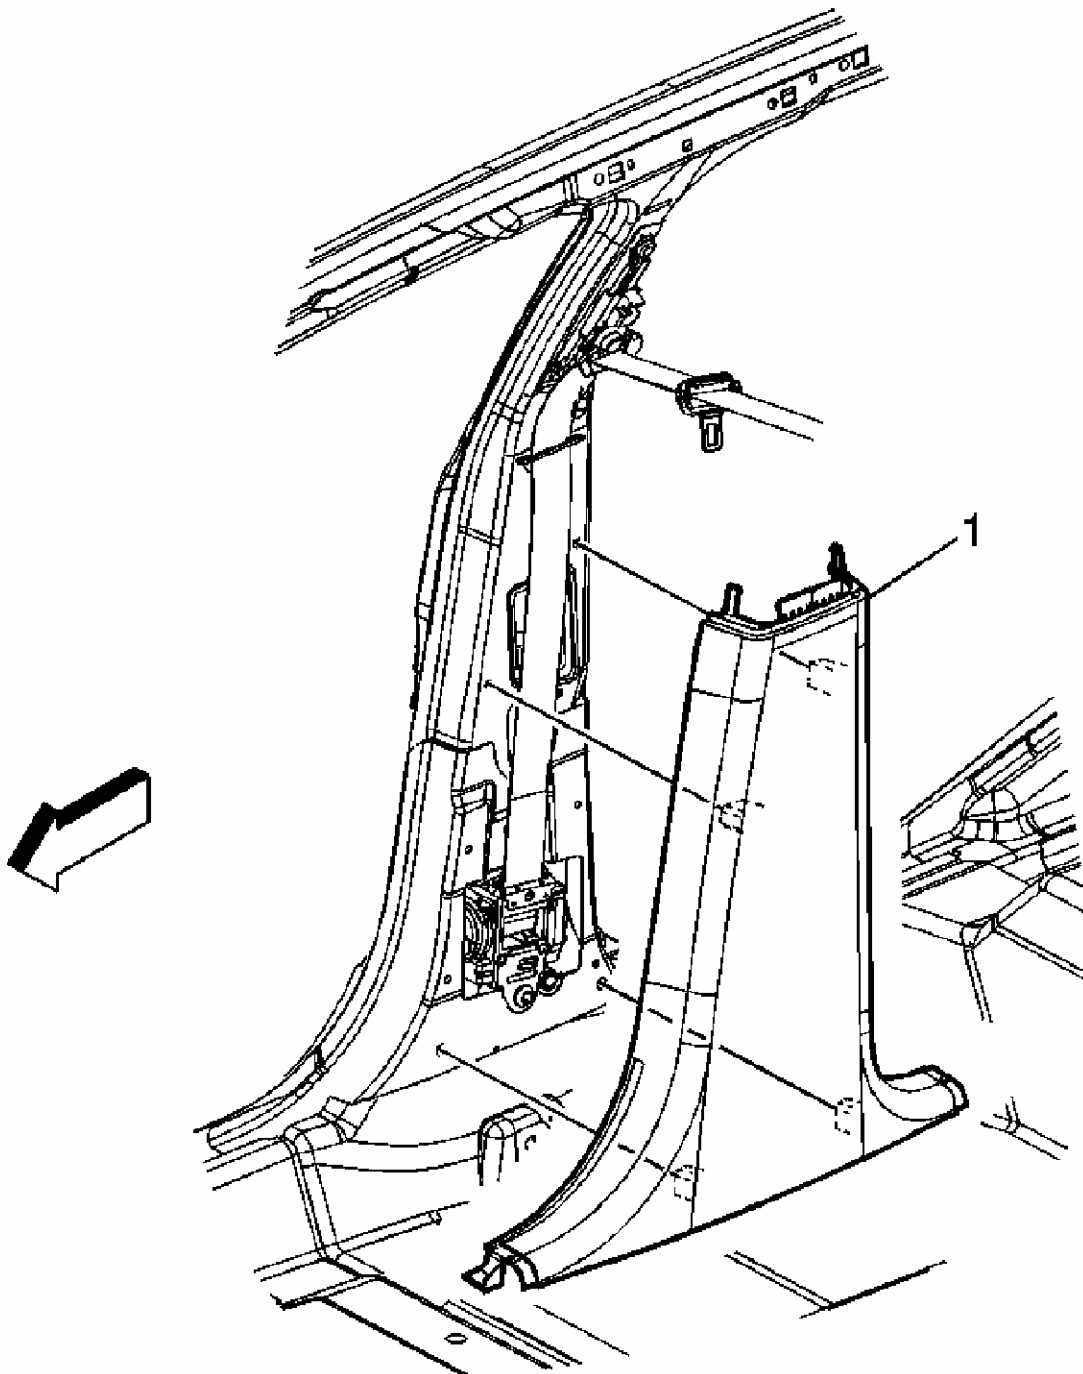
Identifying Center Pillar Lower Garnish Molding
